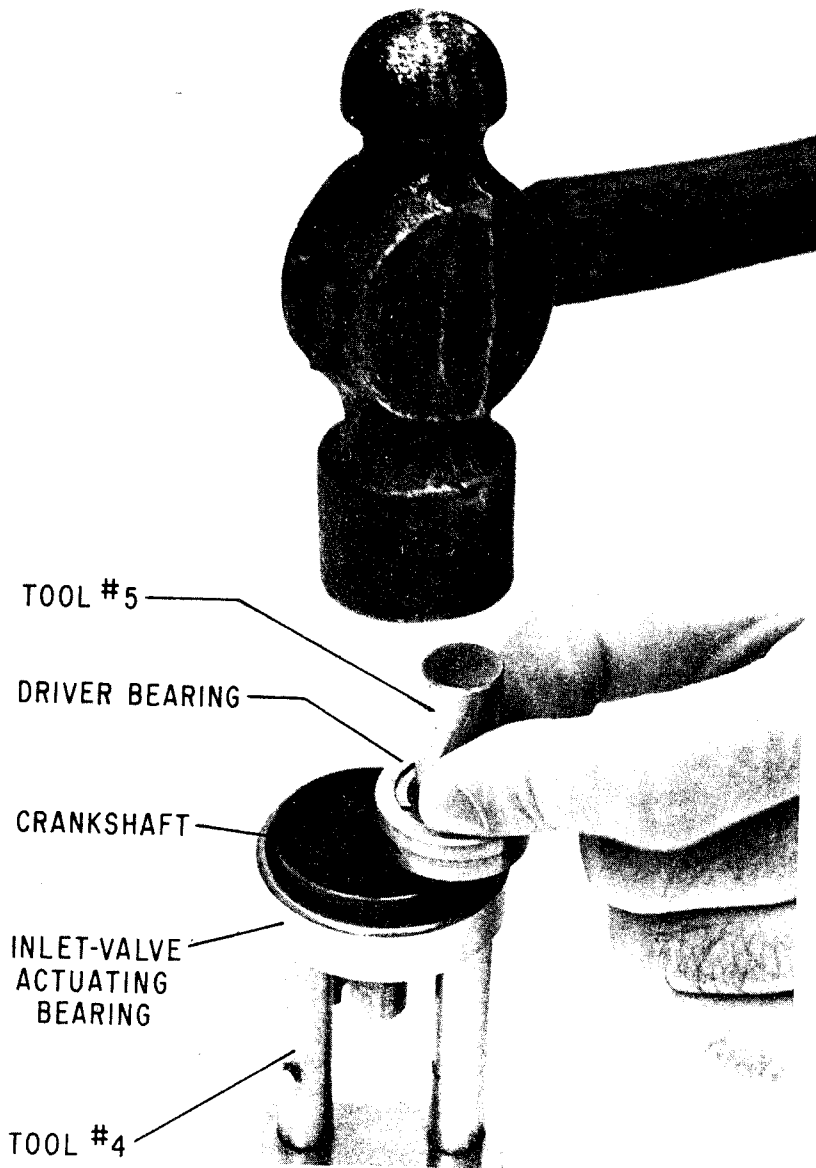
INSTALLING THE DRIVER BEARING
